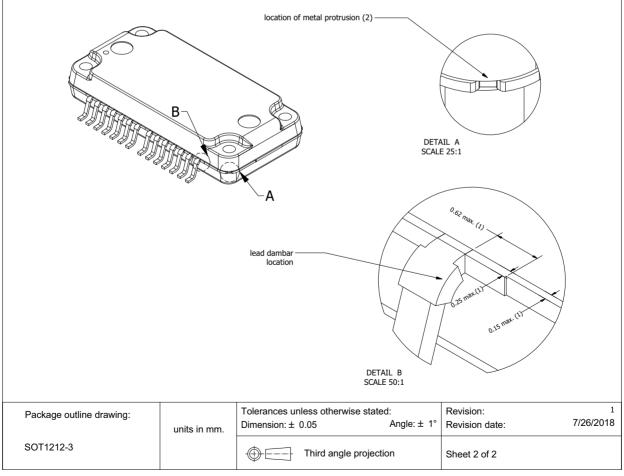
Package outline SOT1212-3 (sheet 2 of 2)
